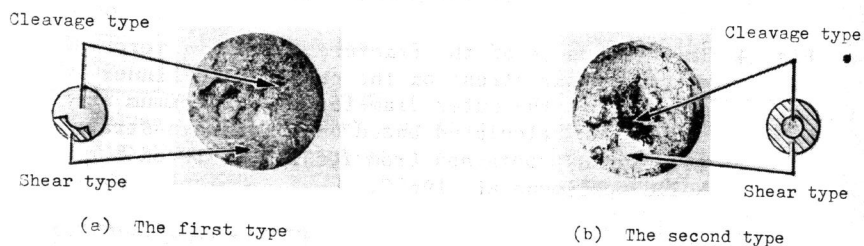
Two types of the change in the fracture mode in torsion fracture of the solid specimen. (a), the first type; (b), the second type.
